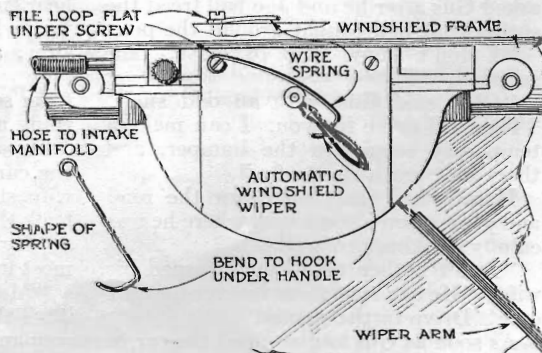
The wiper on any of the vacuum types of automobile windshield wipers can be kept out of the way with a piece of spring wire bent as shown
